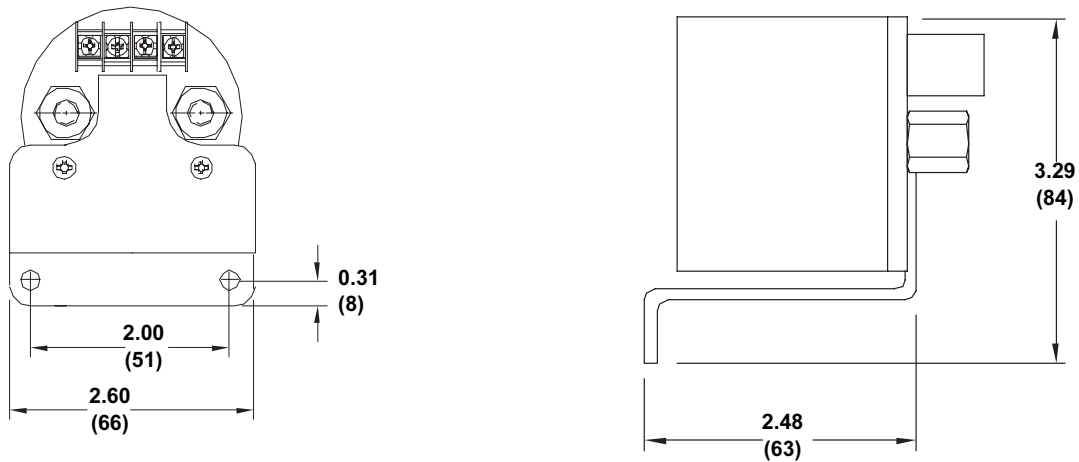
Rosemount 951 Dry Gas Pressure Transmitter Flush Mount Dimensional Drawings
